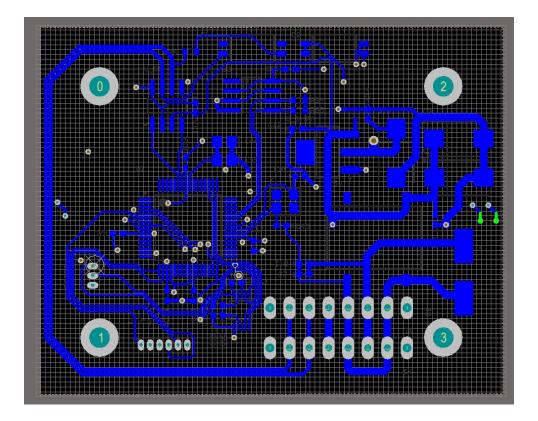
PCB wiring graph, layer 4, power and controller.
